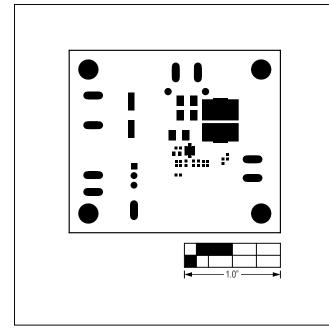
MAX17502G EV Kit Component Placement Guide— Top Solder Mask
